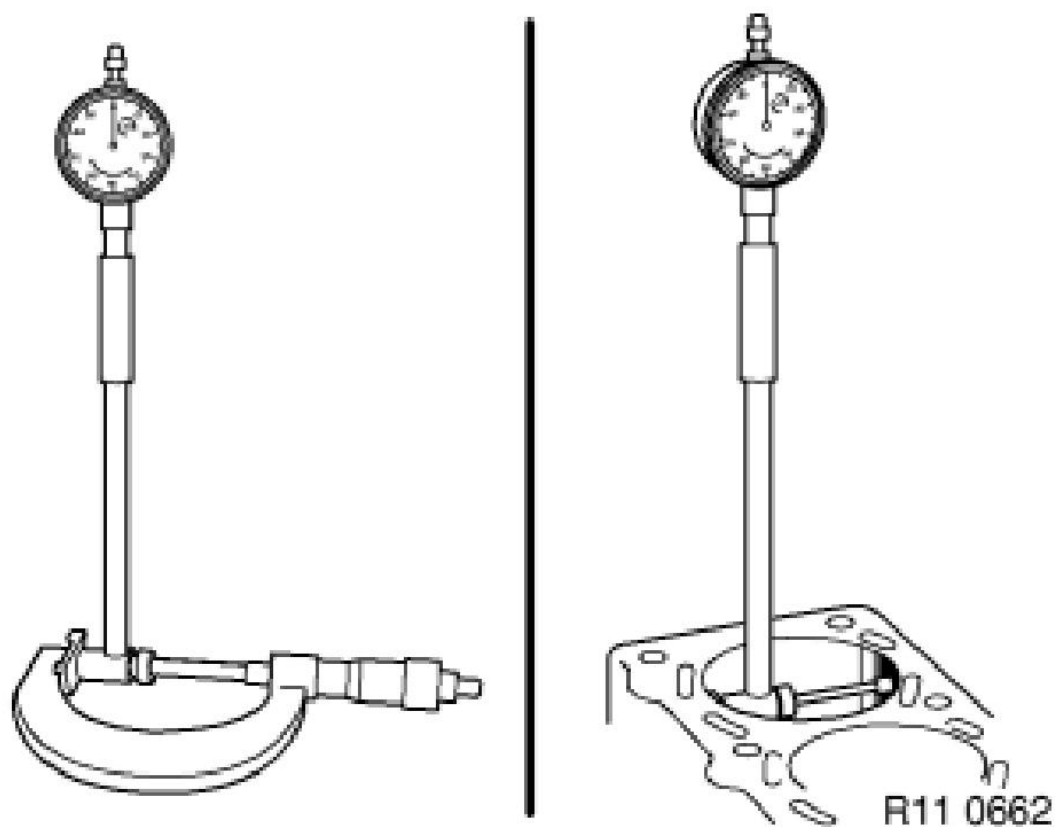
Measuring Diameter Of Cylinder Bore Of Engine Block
